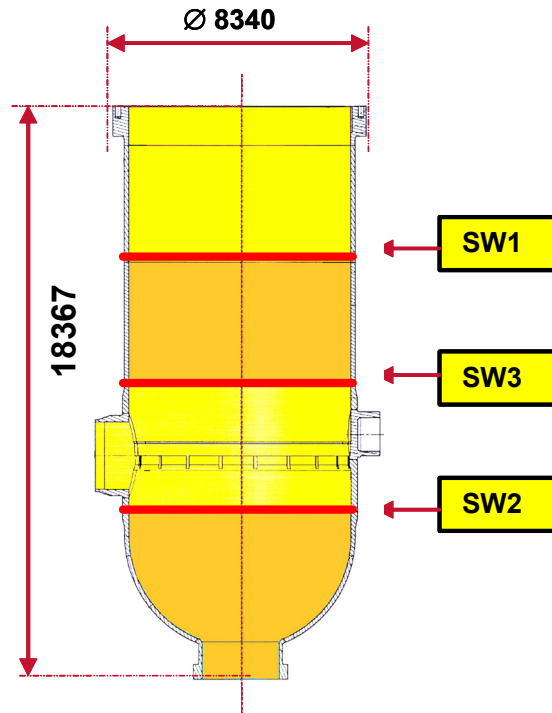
Reactor vessel on site weld locations. Dimensions are in mm.
